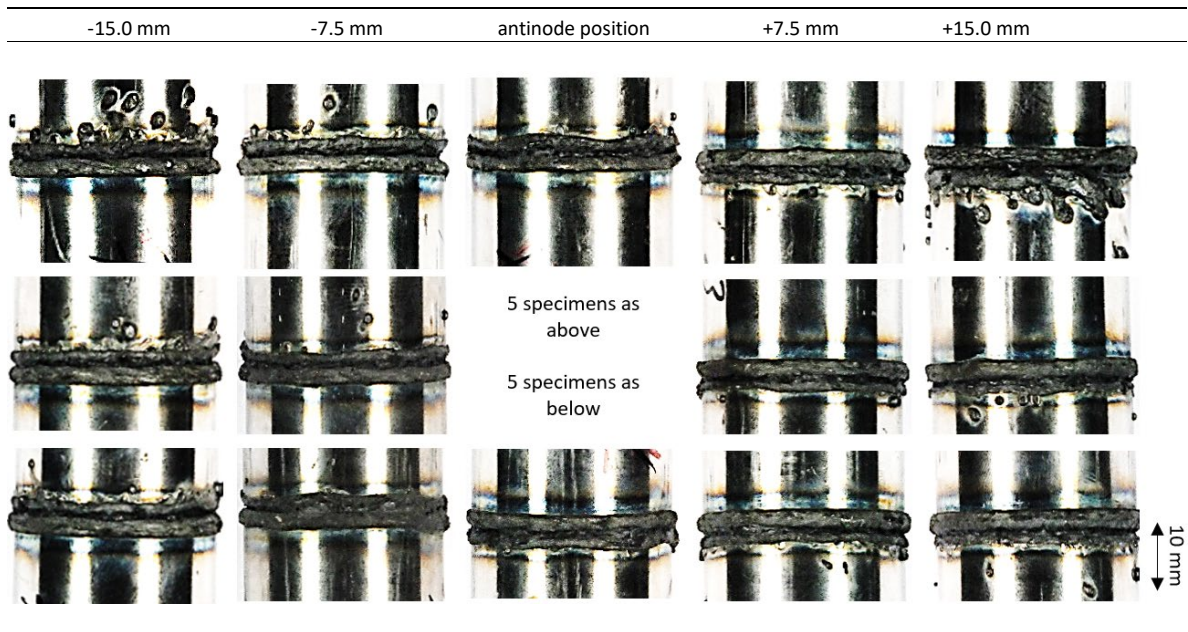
Visual weld seam inspection, depicted side opposite to welding start/end point
